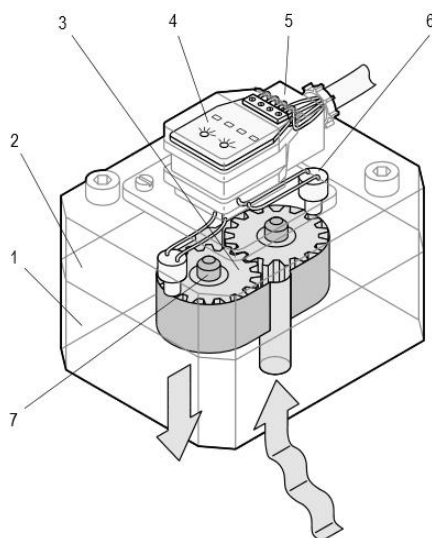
Gear flow meter, 1 – machine body, 2 – housing, 3 – gears, 4 – preamplifier, 5 – connection, 6 – sensor, 7 – bearing [4]
